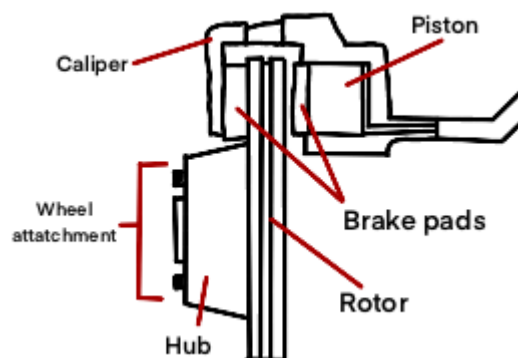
Parts of a disc brake. Piston inside the caliper squeezes brake pads against a rotor attached to the wheel hub. (author's illustration).
